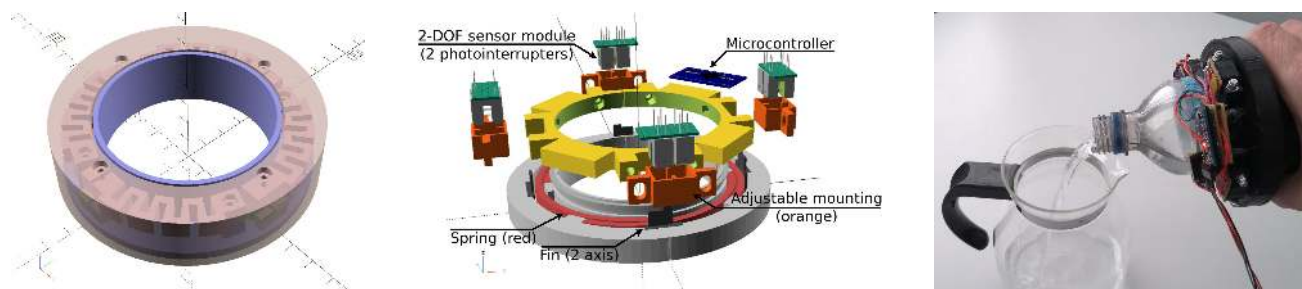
Ring-type F/T sensor for measuring forces during liquid-pouring tasks. (a) Original (unsuccessful) design with outer grasp part (pink), inner bottle carrier (blue), zigzag elastic springs. (b) Redesigned sensor with spiral spring, adjustable 2-DOF sensor modules, and Arduino microcontroller. (c) Prototype.
